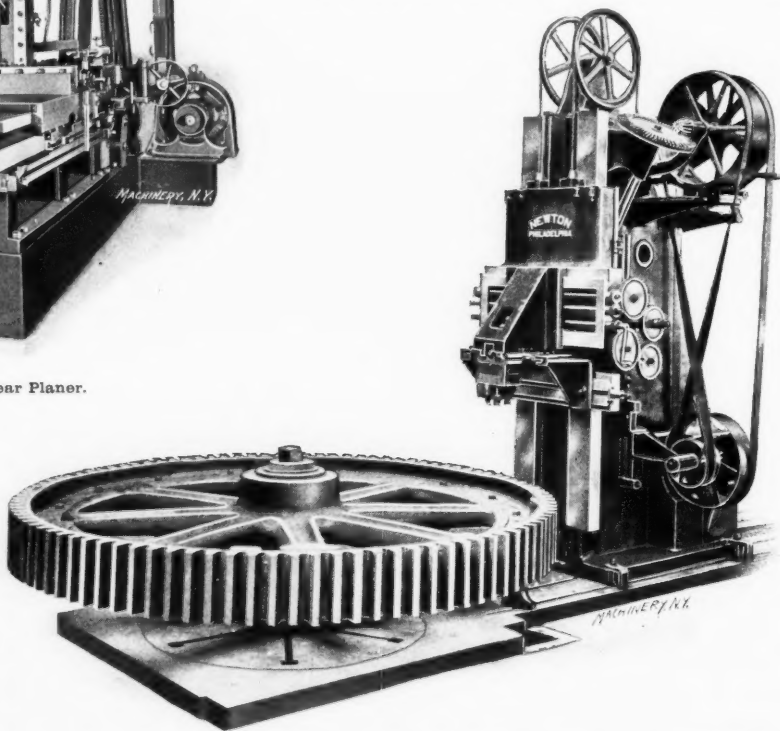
The Newton Portable Slotter, arranged with Templet Mechanism and Indexing Base for Cutting Spur Gears.
